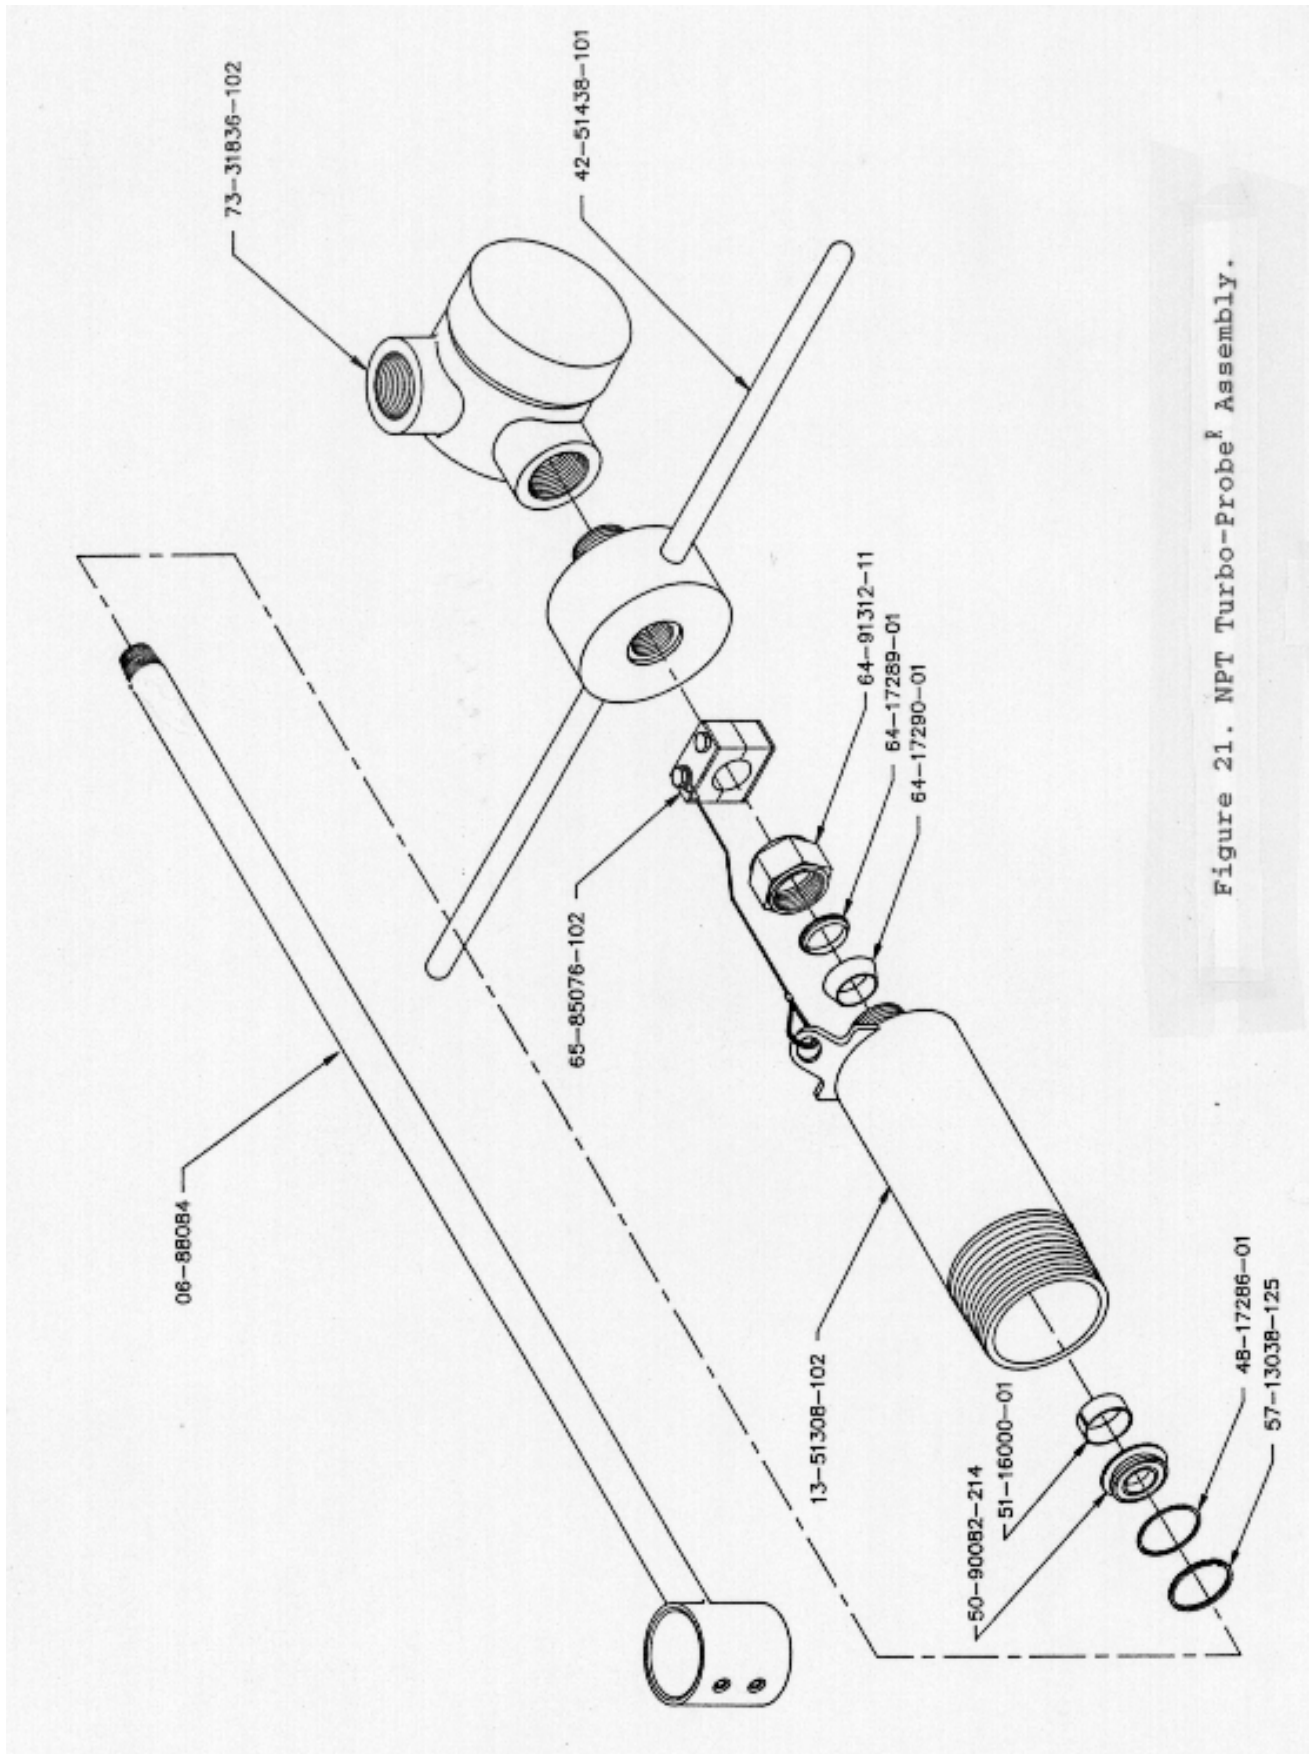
NPT Turbo-Probe<sup>®</sup> Assembly.
